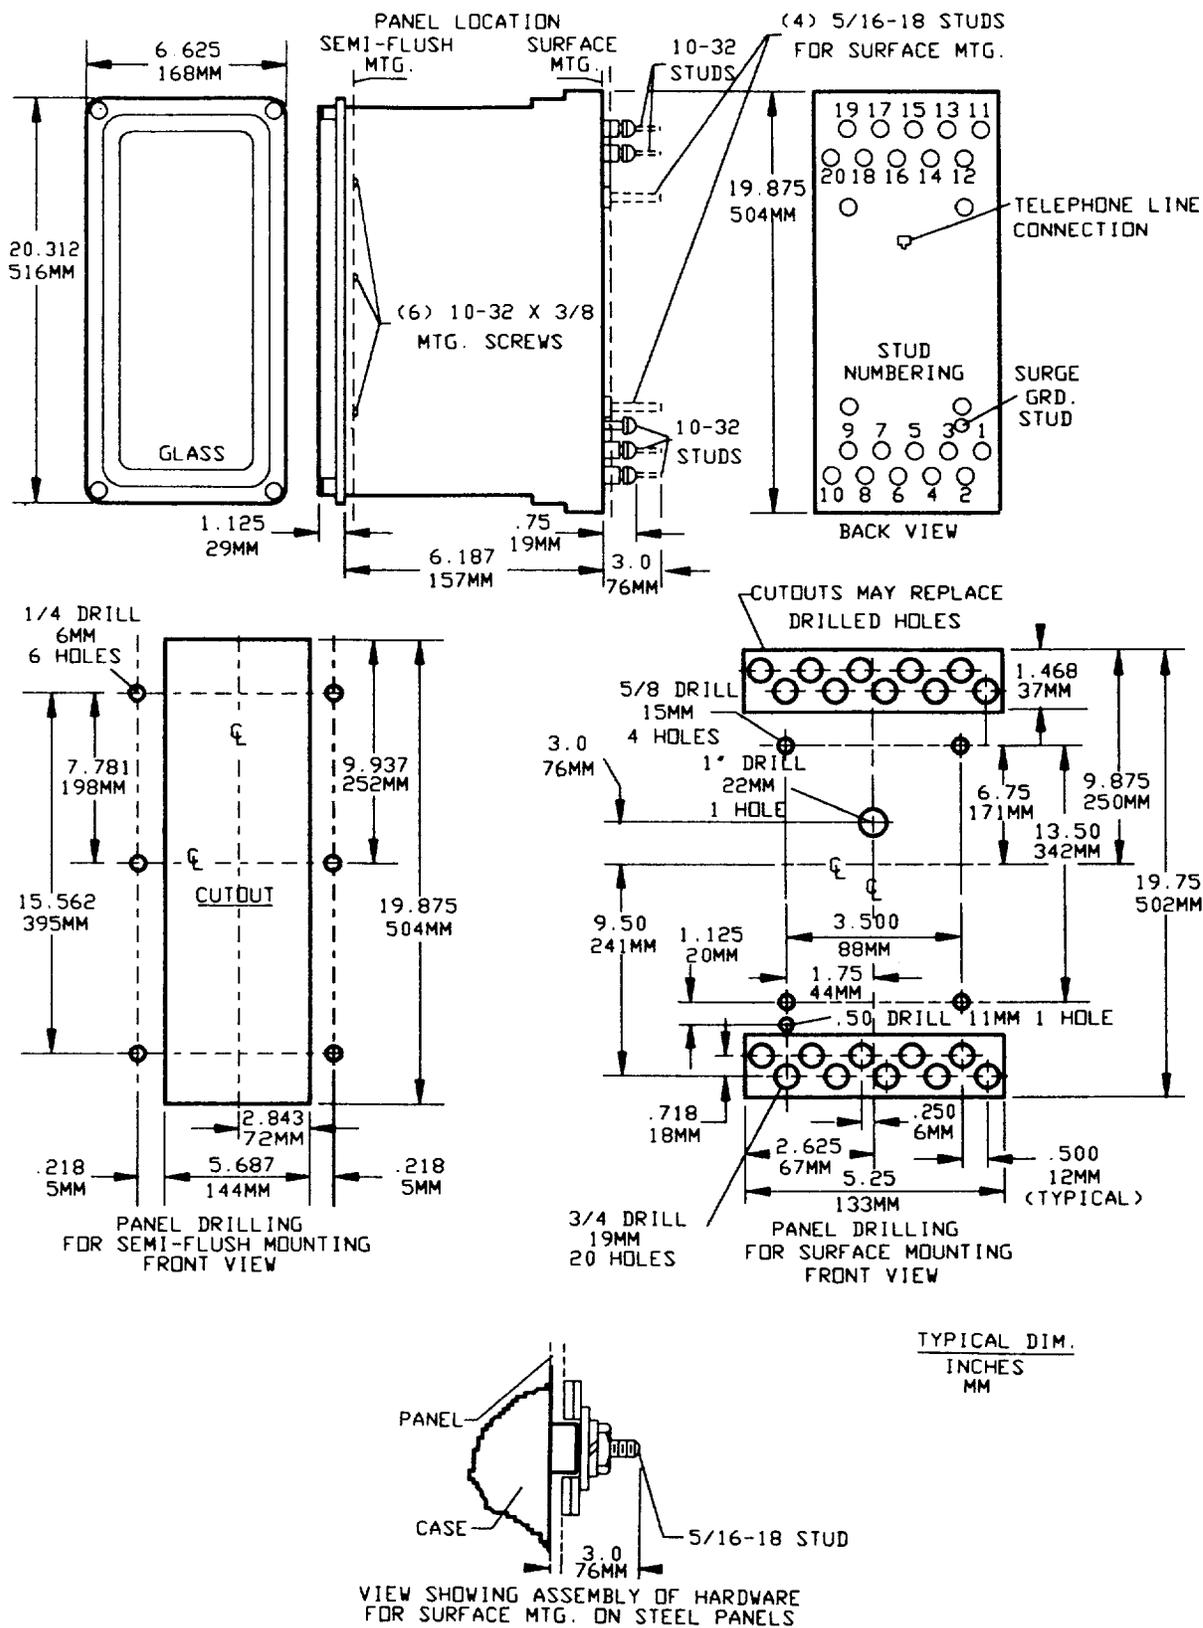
(0215B8430 [1]) Outline and Panel-Drilling Dimensions
